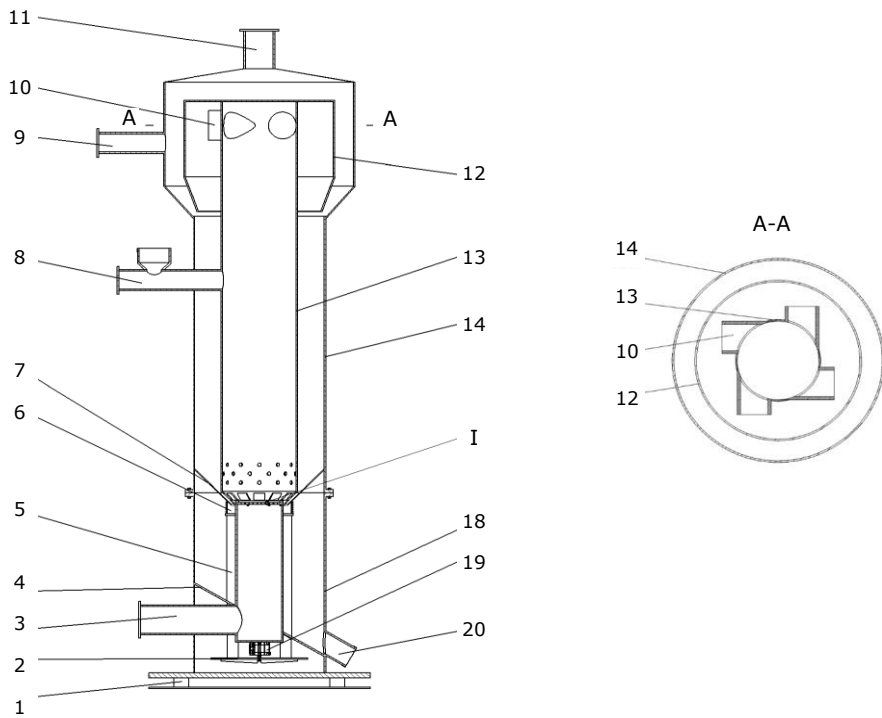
A powder circulating short tube air dryer. 1. Weighing device; 2. Connecting disc; 3. Air-jet tube; 4. Inclined slide plate; 5. Connecting rod guide tube; 6. Connecting rod; 7. Small holes; 8. Feeding tube; 9. Vacuum exhaust tube; 10. Cyclone exhaust tube; 11. Return tube; 12. Return flow tank; 13. Inner tube; 14. Outer tube; 15. Ring pressure net plate; 16. Screen mesh support plate; 17. Screen mesh support plate; 18. Return gas tank lower section; 19. Cylinder; 20. Outlet tube.
